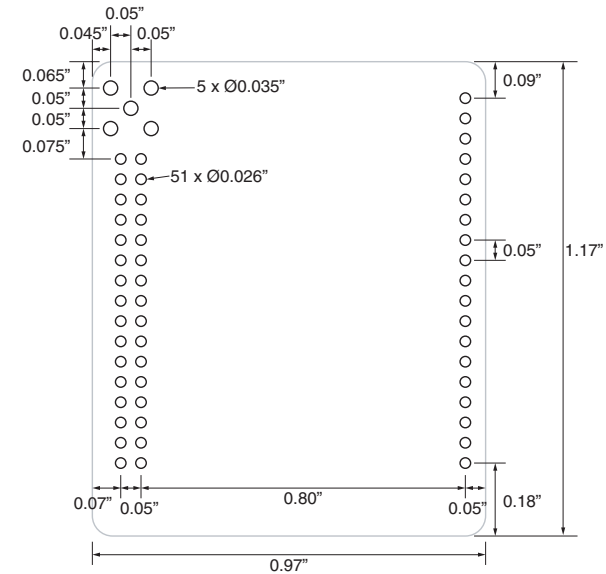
EVM-xxx-DT PCB Layout Dimensions
